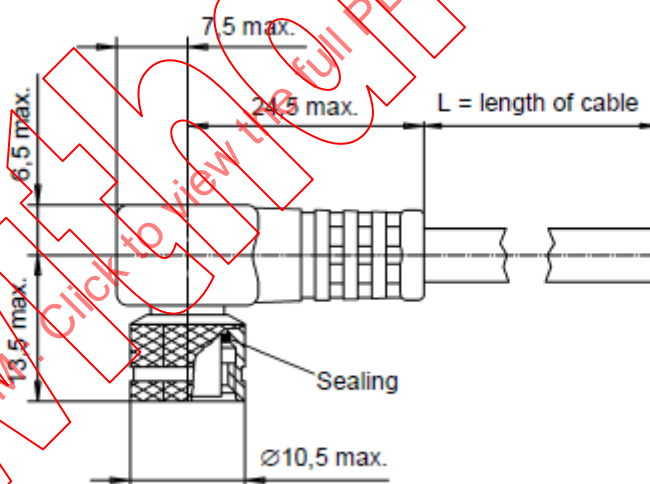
Non-rewireable connector, female contacts, right angled version, with locking nut
